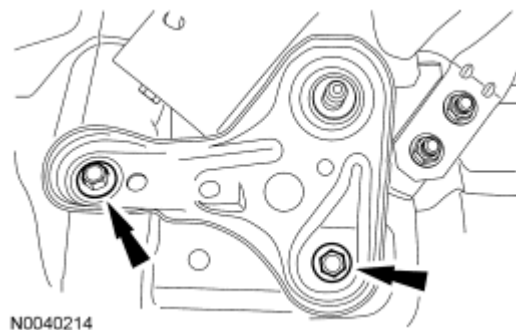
Locating Subframe Brackets And Bolts Finger-Tight
